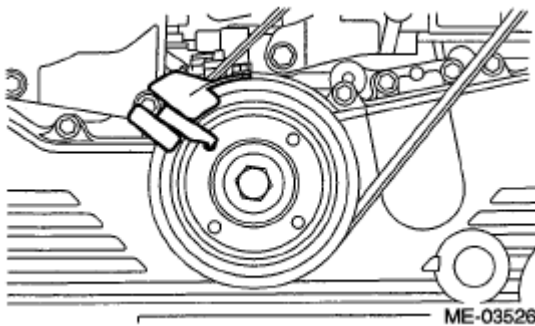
Identifying Belt Guide, Holder And Crank Pulley
